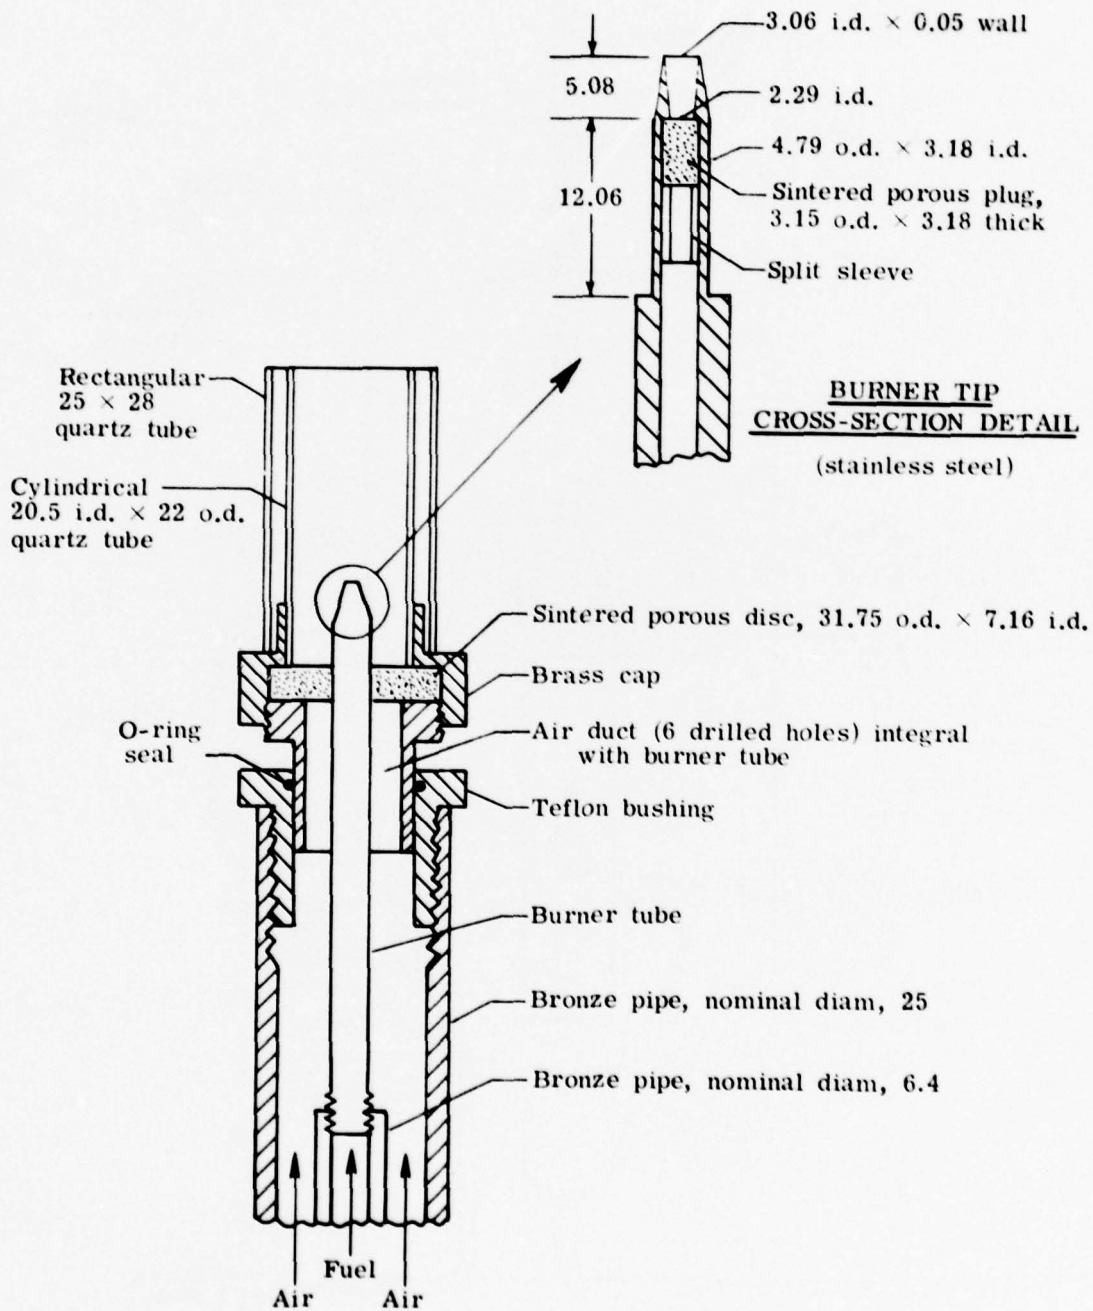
Burner assembly and detail. All dimensions are in millimeters.
